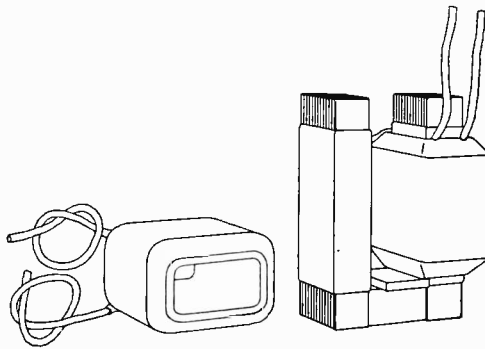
Core with Upper Yoke Removed, Showing One Coil in Position
